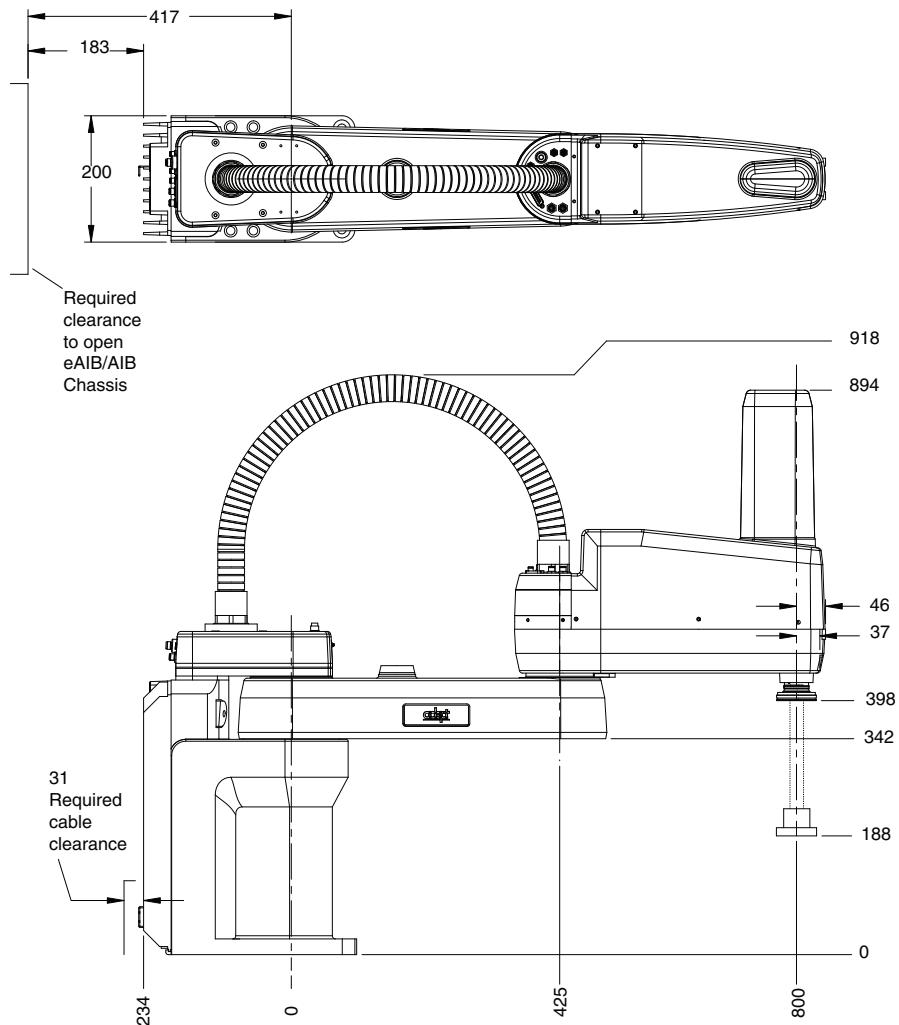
Adept Cobra s800 Robot Top and Side Dimensions
